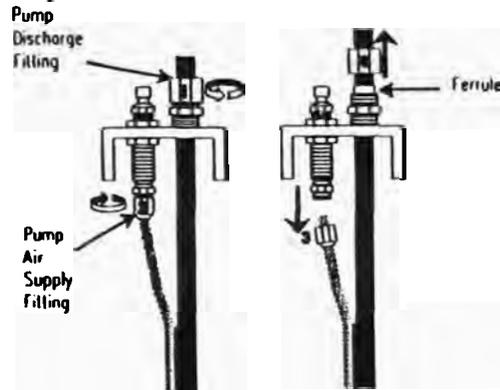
Unscrew Fitting Caps & Expose Ferrules
